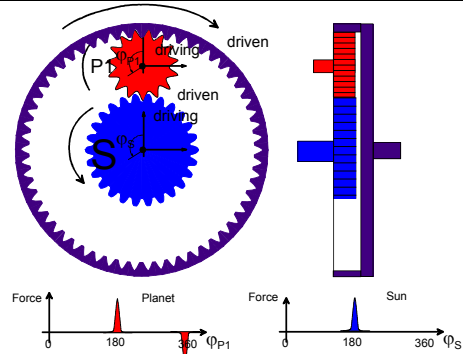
Simple planetary gear and forces in the planet gear and sun gear at one revolution
